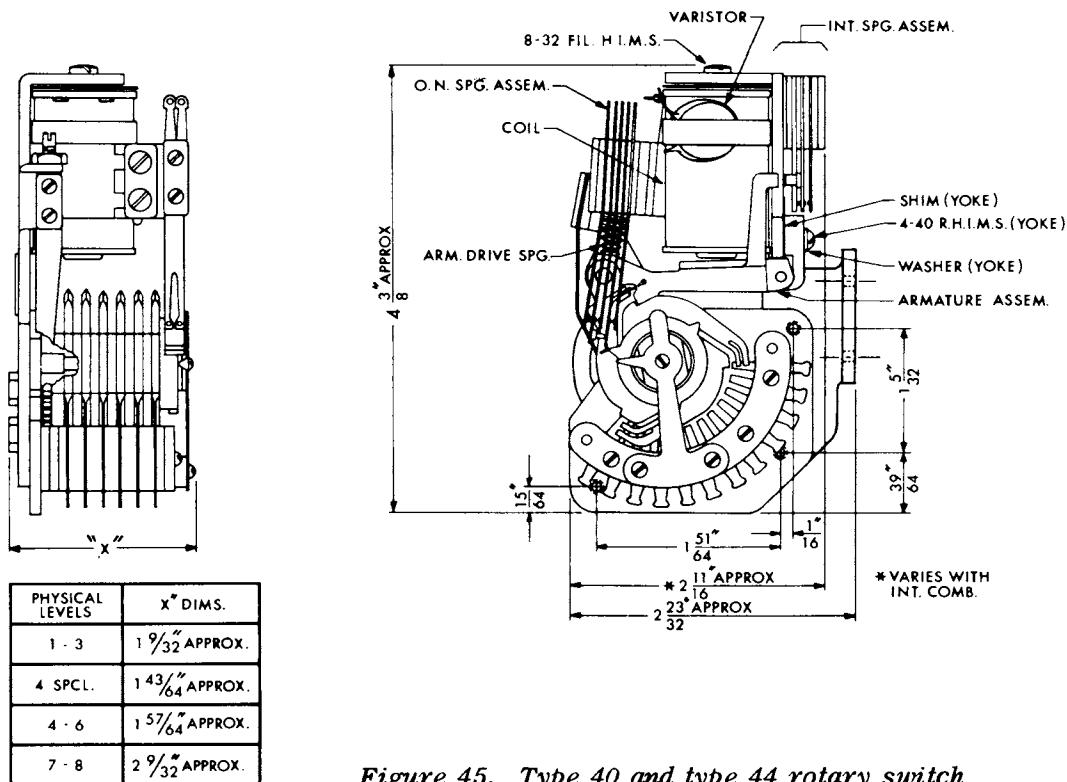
Type 40 and type 44 rotary switch over-all dimensions.
